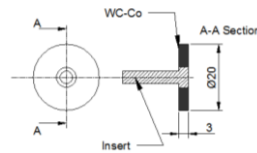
Figure A. The specimen produced by the Inserted Powder Injection Molding method
